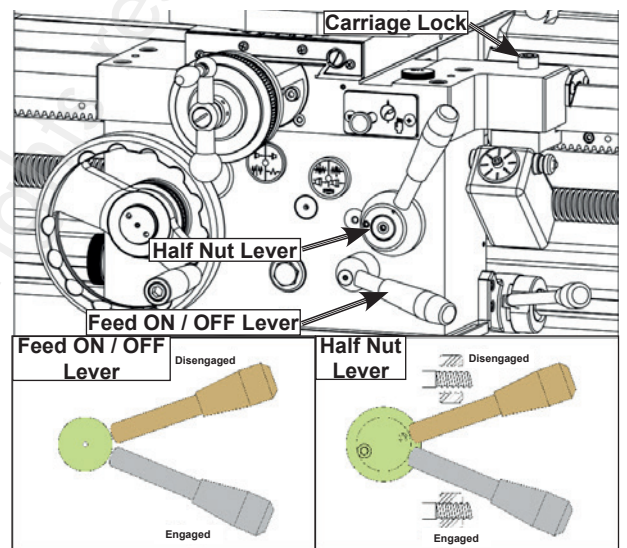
Half nut and carriage feed levers shown in the disengaged positions
